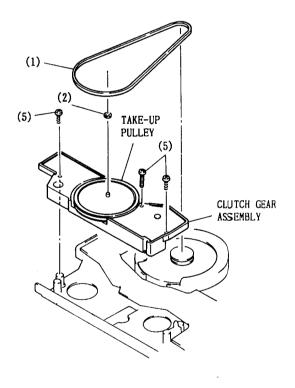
Take-up Pulley and Clutch Gear Assembly
